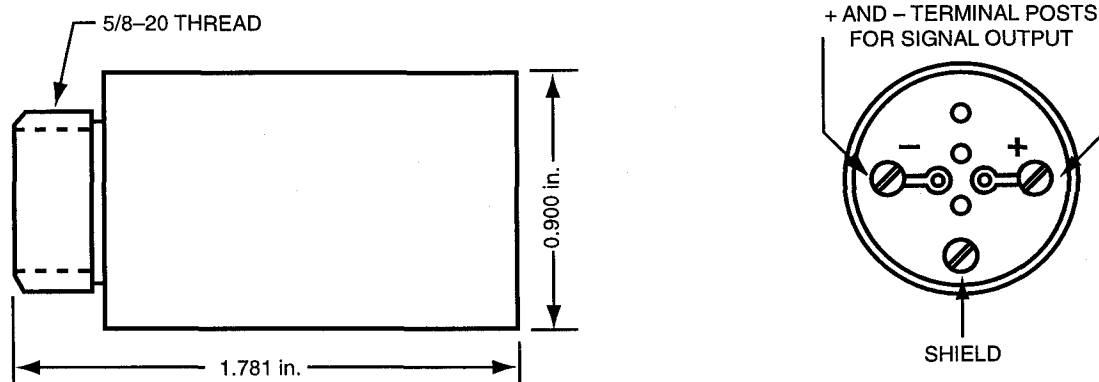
PHYSICAL DIMENSIONS AND CONNECTIONS FOR SPECIAL R702 SENSING HEAD
